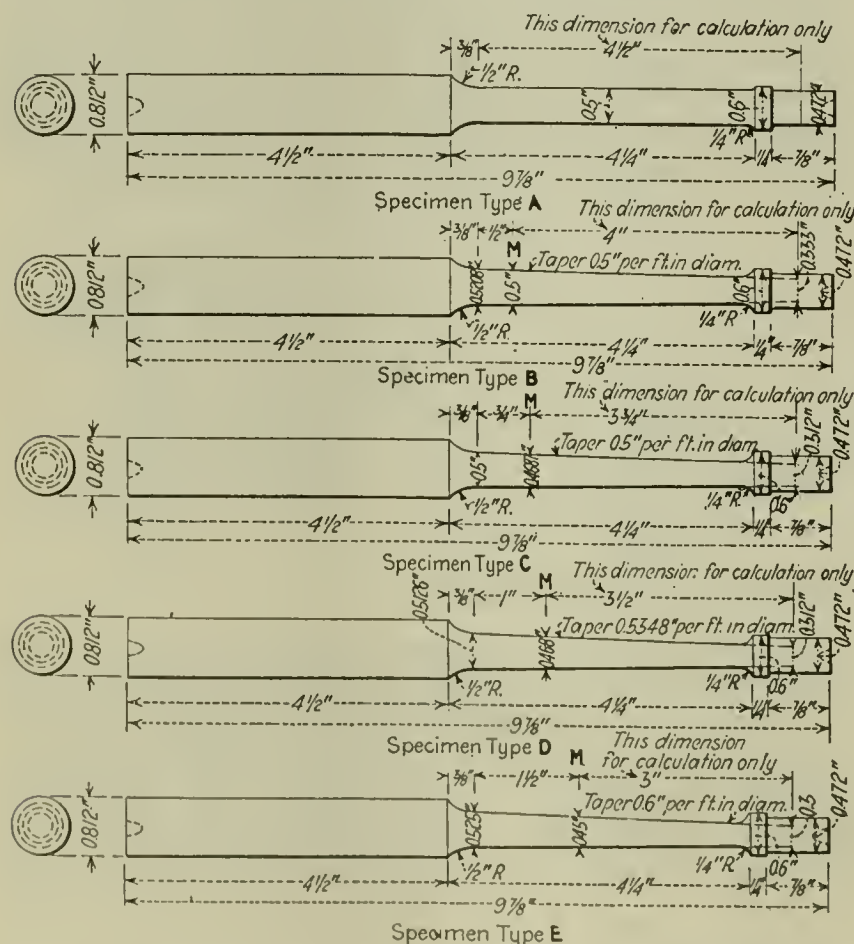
DIMENSIONS OF ENDURANCE TEST SPECIMENS
